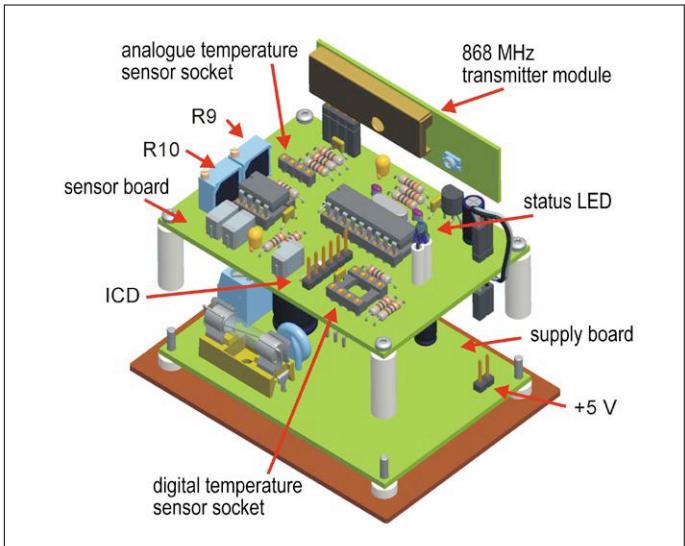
The circuit board with the parts for the power supply is underneath the sensor board.
